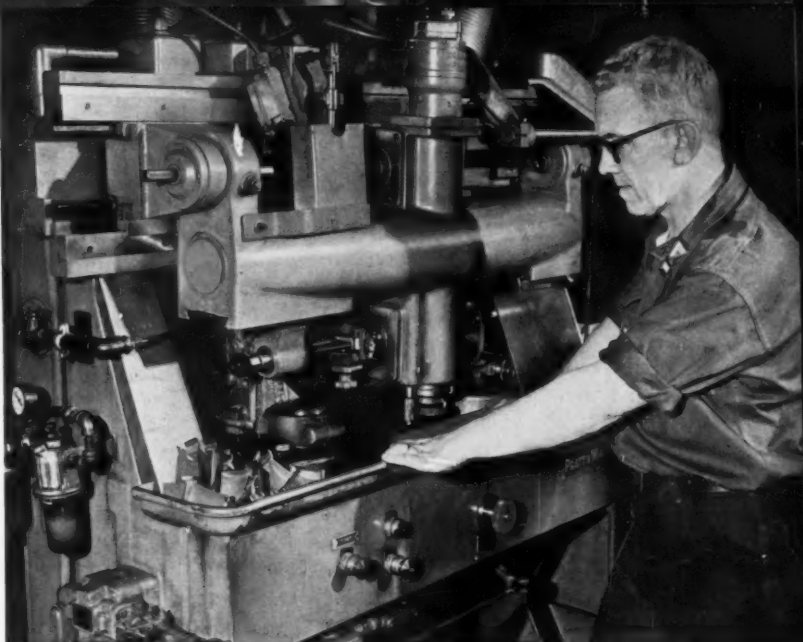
Turbine rotor blade is being shaped by an abrasive-coated belt on this profile-grinding machine. Three cams control its operation—a master cam, lower right-hand quadrant; a wave cam, upper right-hand quadrant; and a velocity cam, upper left-hand quadrant.
